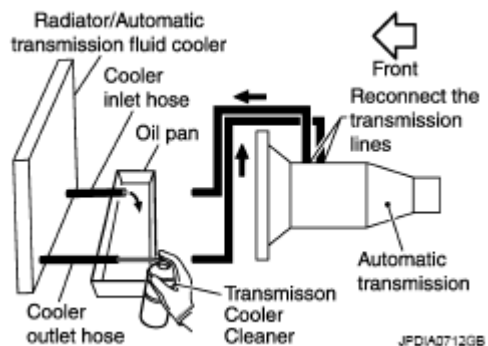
Inserting Extension Adapter Hose Of Can Of Transmission Cooler Cleaner (Nissan P/N 999MP-AM006) Into Cooler Outlet Hose
